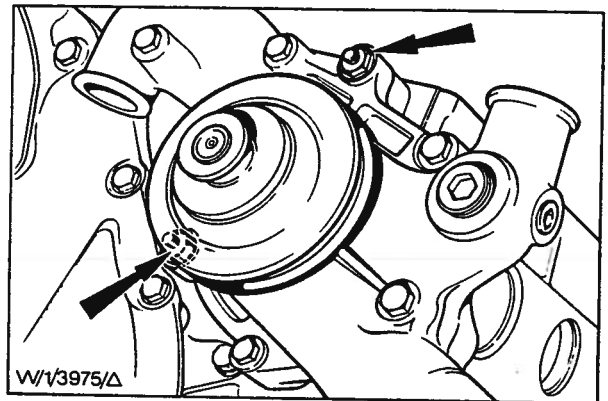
Water Pump Mounting Nuts and Bolts on 2728T Engine
